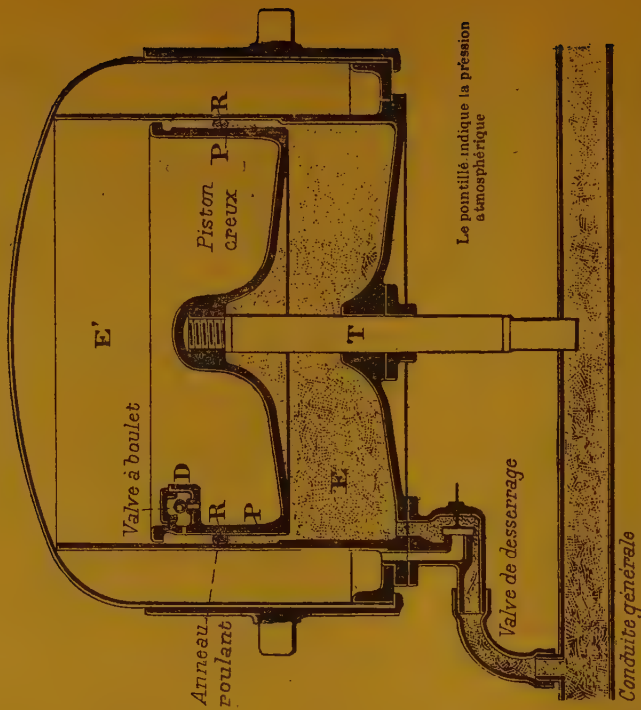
Brake applied by air being admitted to the train pipe.* — Air, on being admitted to the train pipe by the driver, or by a breakage of the train pipe, holds the ball valve D upon its seat and causes piston P and its rod T to move upwards. The rubber rolling ring, which moves upwards in consequence of the movement of the piston, seals the space E' above the piston.
